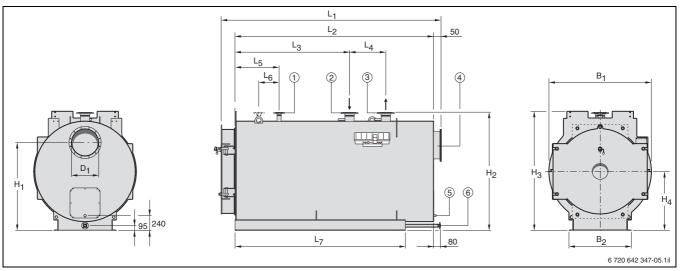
Dimensions Logano S825L LN, boiler sizes 750 to 3500 (dim. in mm)
